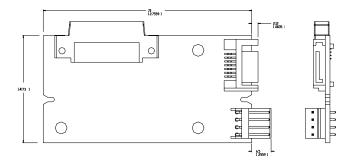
SATA-to-IDE Converter Board Mechanical Outline
